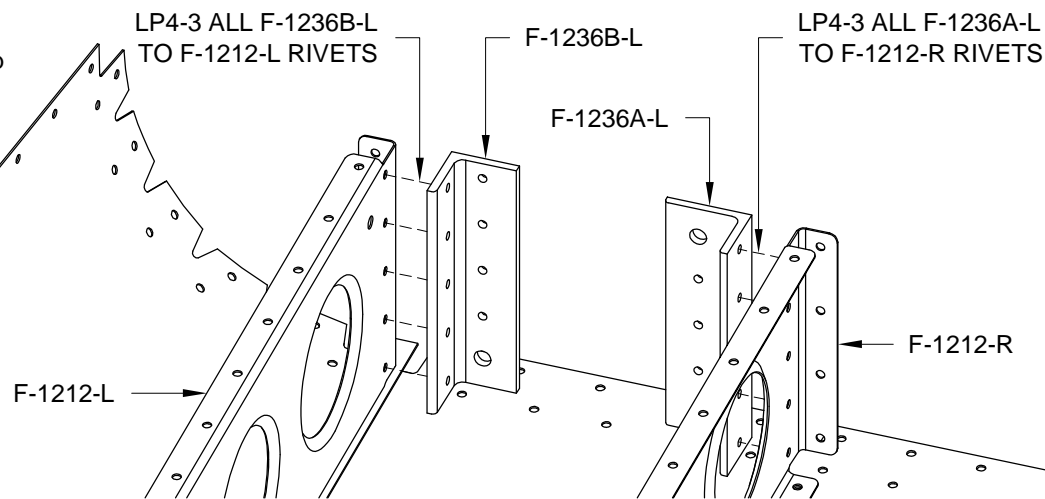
RIVETING THE STEP ATTACH ANGLES
